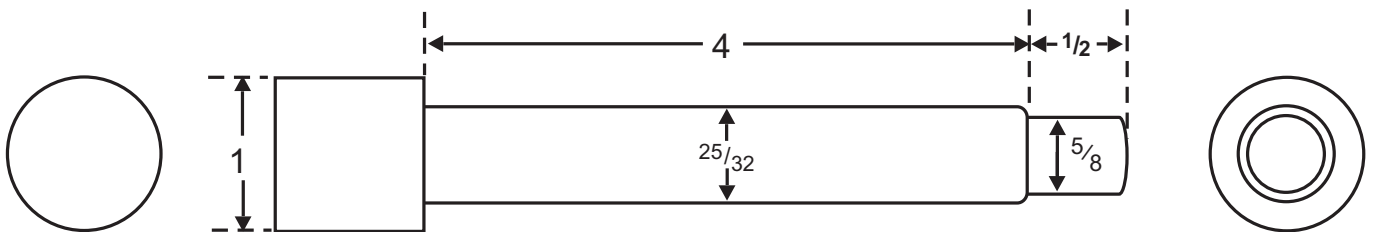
Clutch Alignment Tool Dimensions (All Models)
